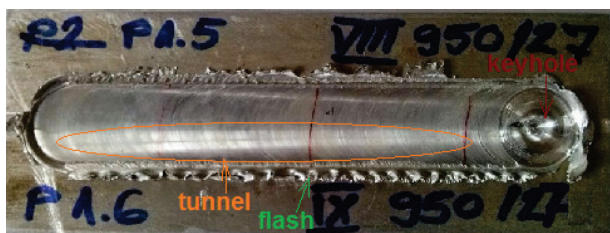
The face of weld metal of AA 5052-H32 T joint
